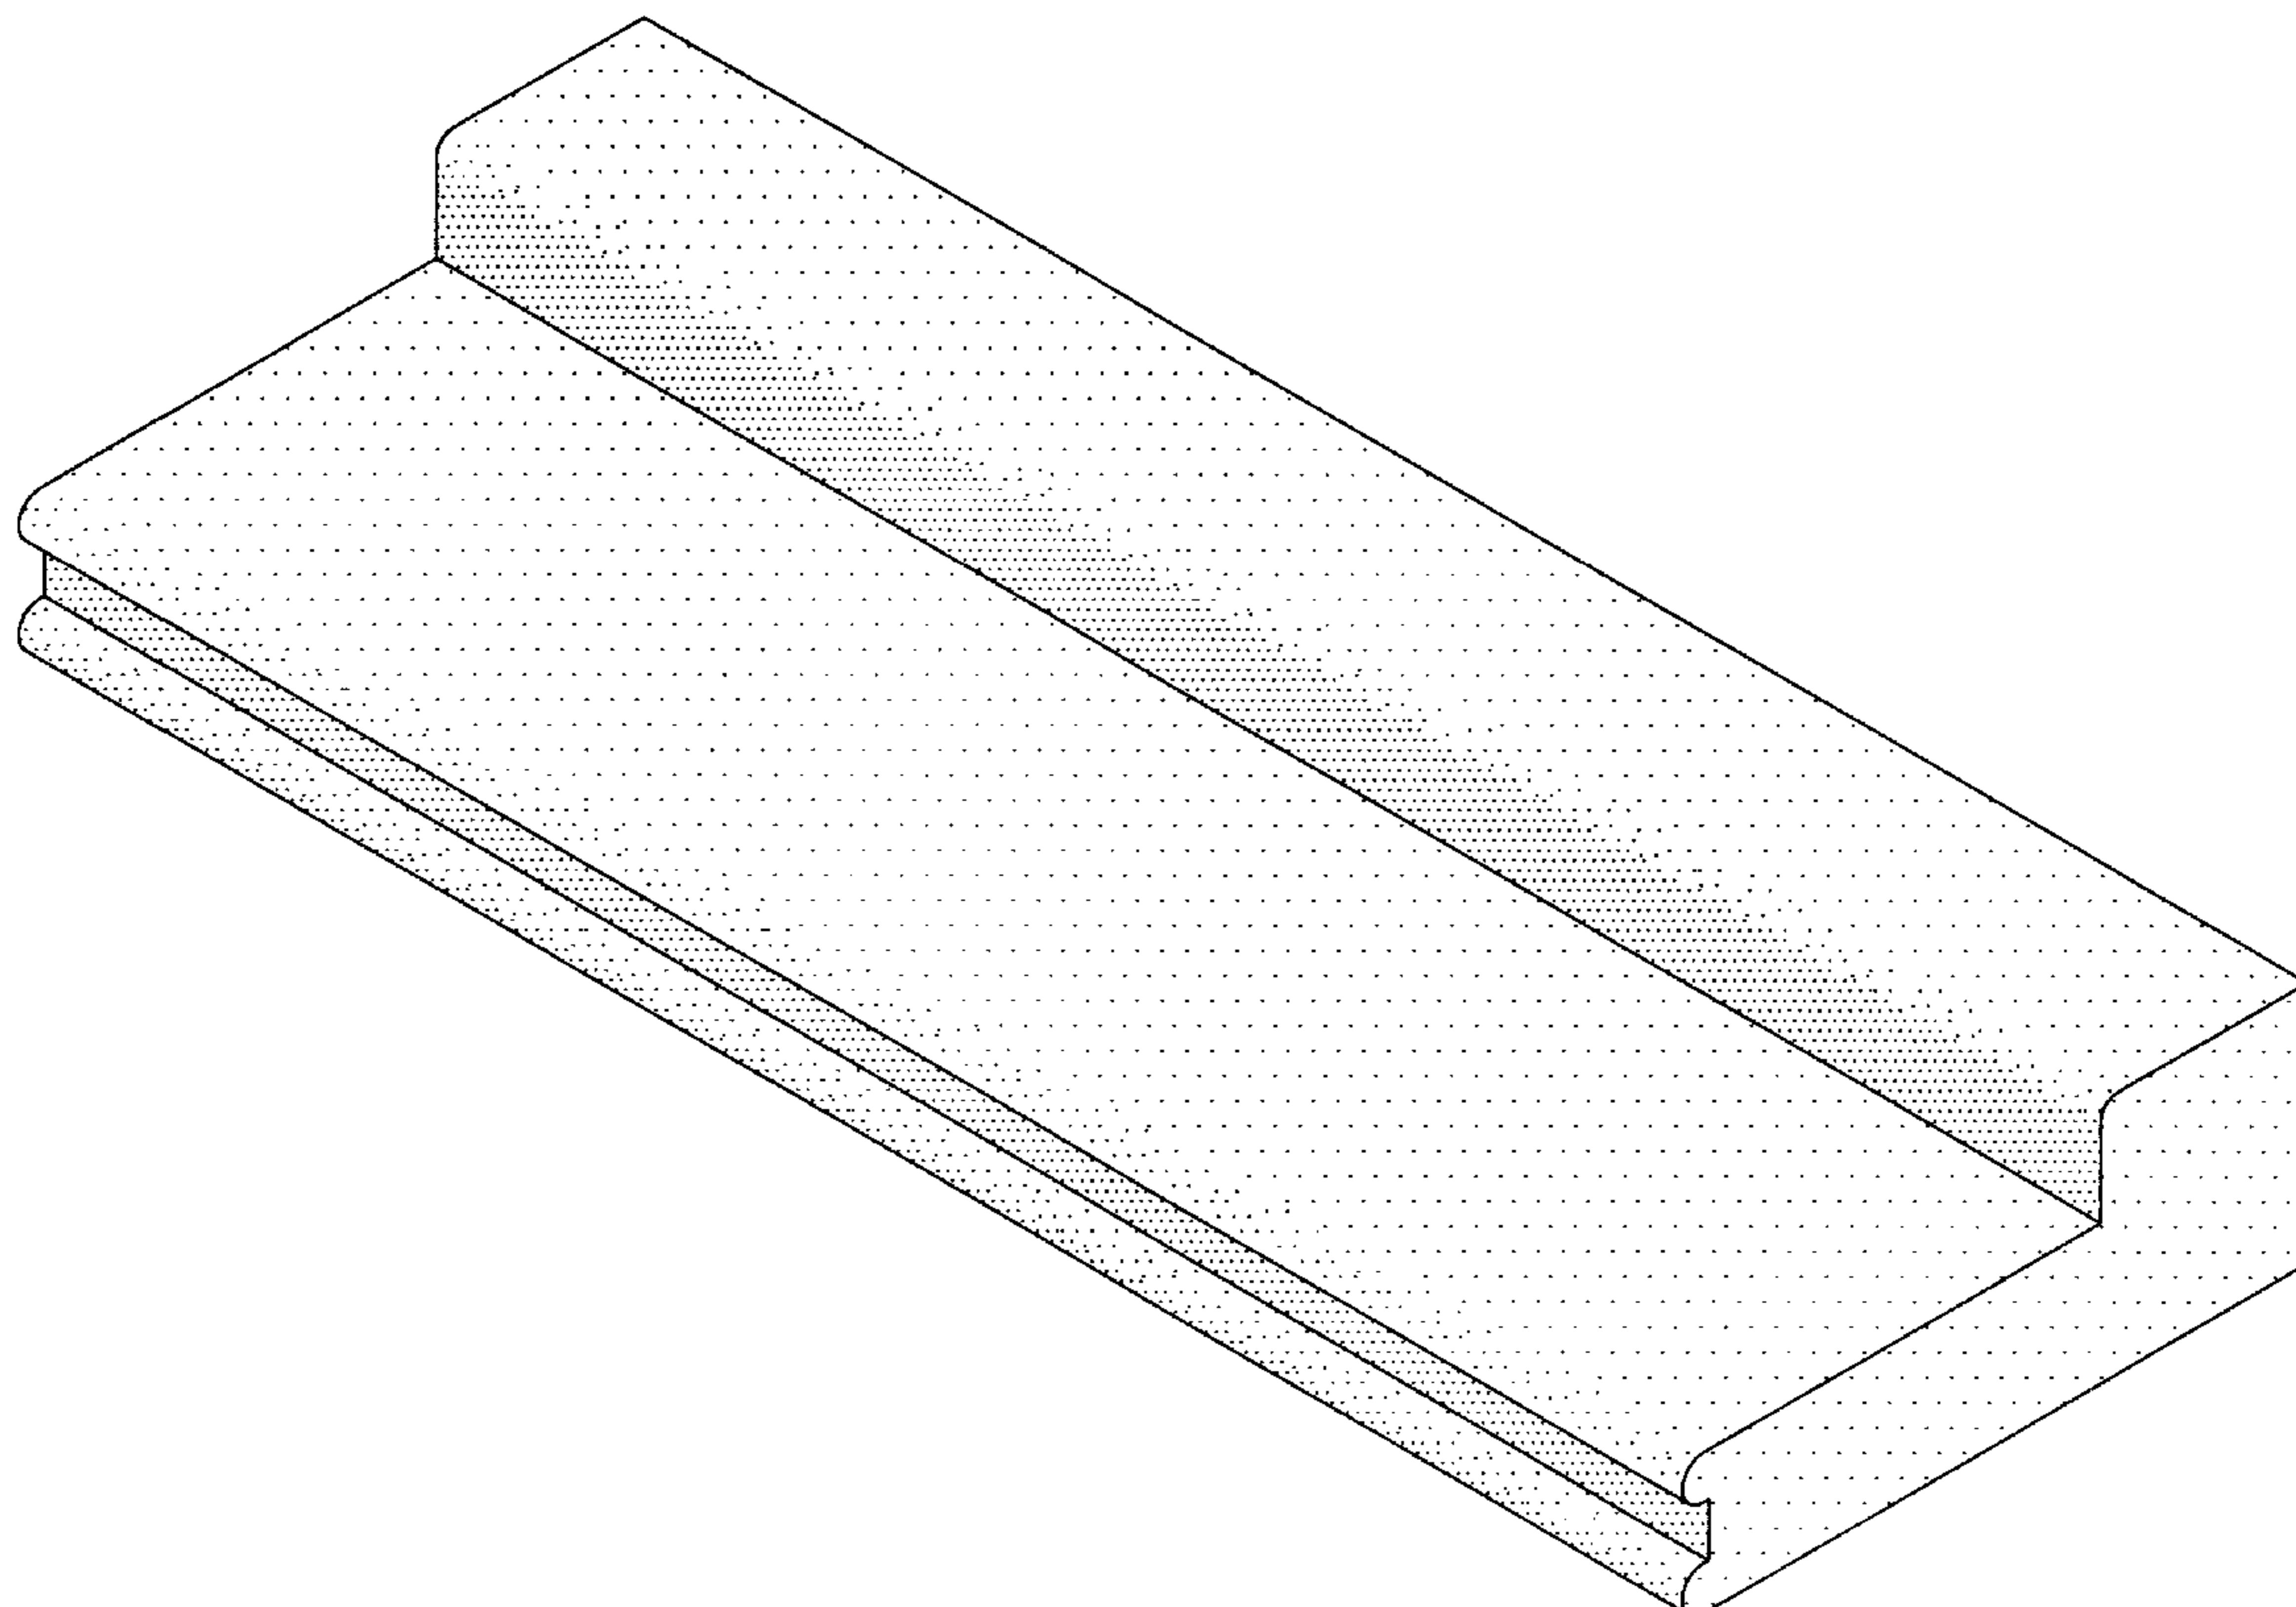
is a frontal view of the extruded plastic window shutter frame sill plate molding;
